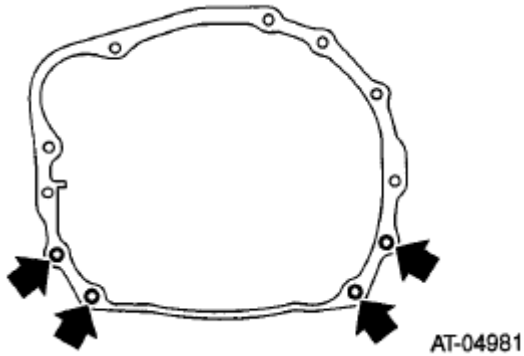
Locating Engine And Transmission Bolts And Nuts
